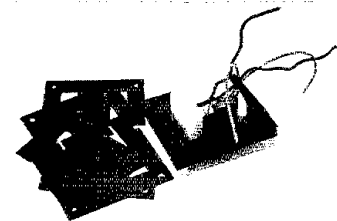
Partially reassembled core. Reassembly can usually be accomplished quite a bit quicker than disassembly. If it is likely that enough shellac was scraped off during disassembly to cause shorting between laminations, add a thin coat of shellac or glyptol as you put the core back together again.
